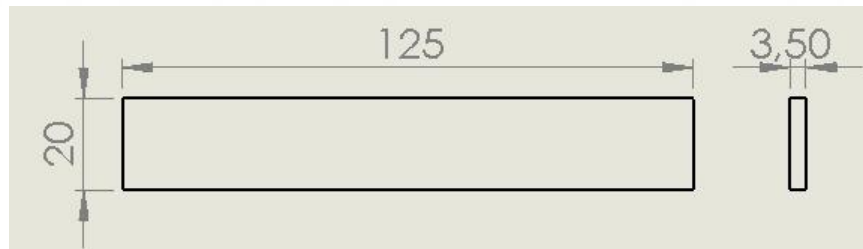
Technical drawing of flexural test samples (dimensions in mm)
